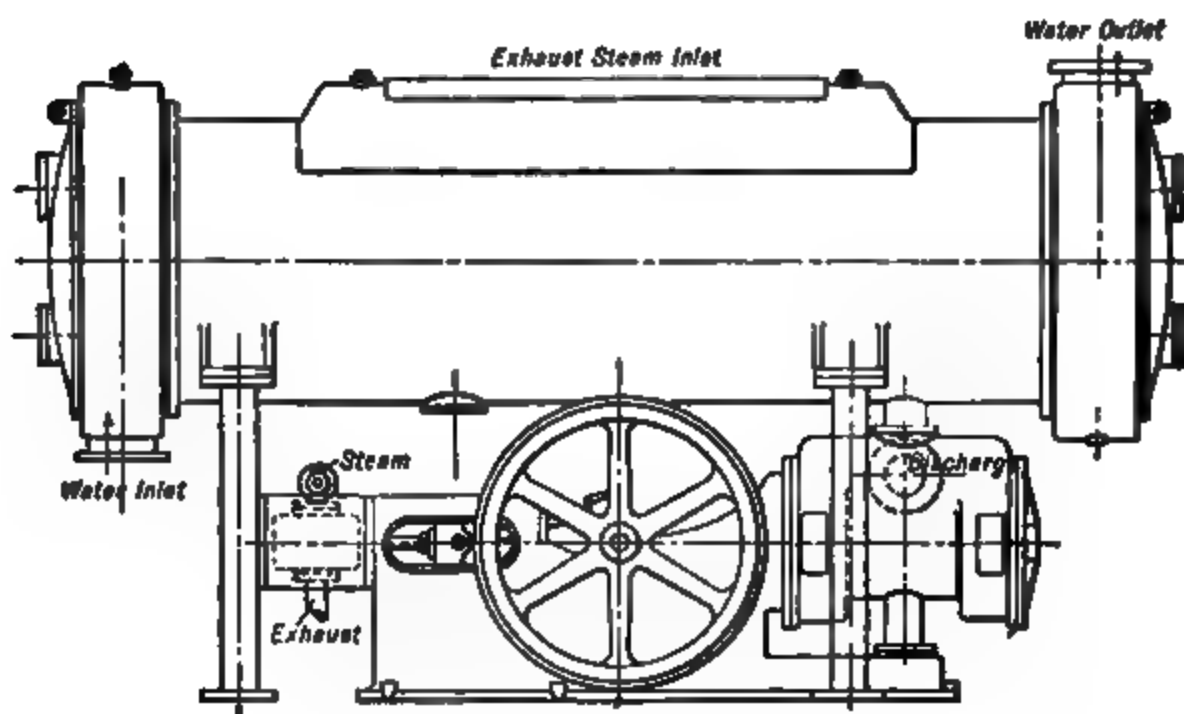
SURFACE CONDENSER WITH WET VACUUM RECIPROCATING PUMP, FOR MEDIUM-SIZE INSTALLATIONS.
